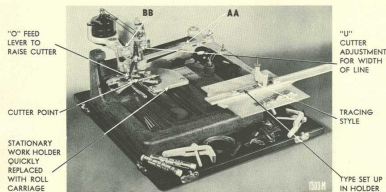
3-Q GENERAL PURPOSE ENGRAVER
